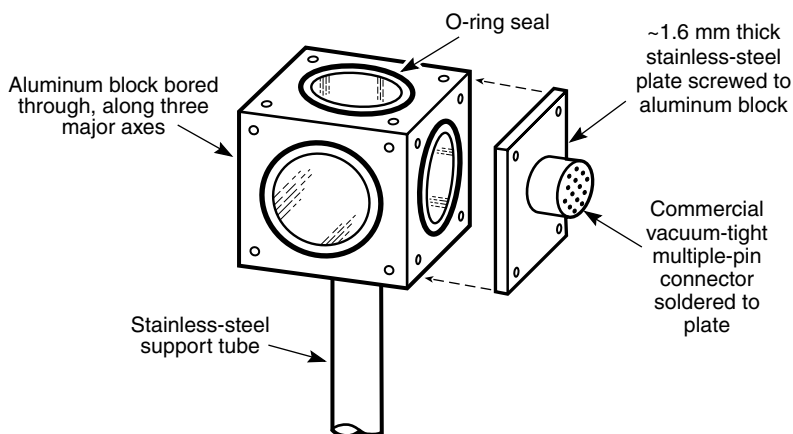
Vacuum-tight aluminum connector box with removable plates for mounting commercial vacuum-tight multiple-pin connectors.
